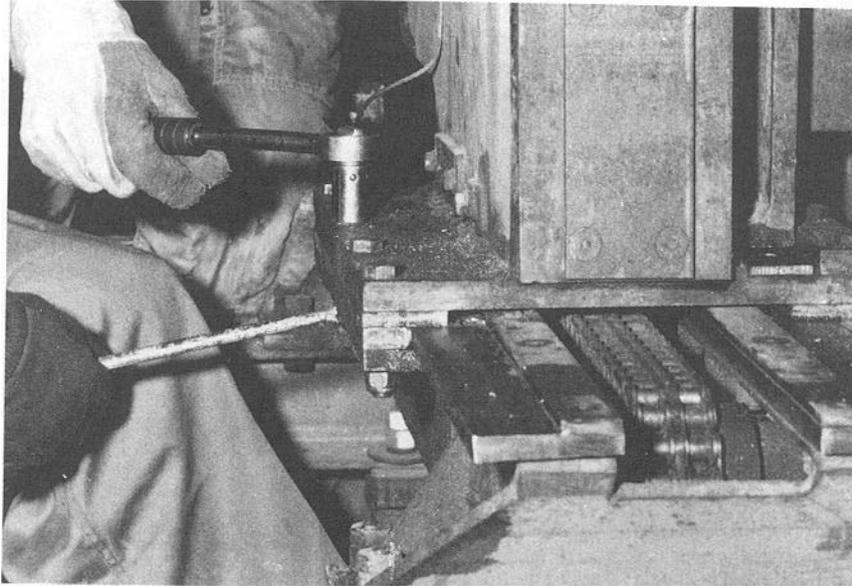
Adjust shim strips between sliding surfaces of the headblock and knee to remove slack.
